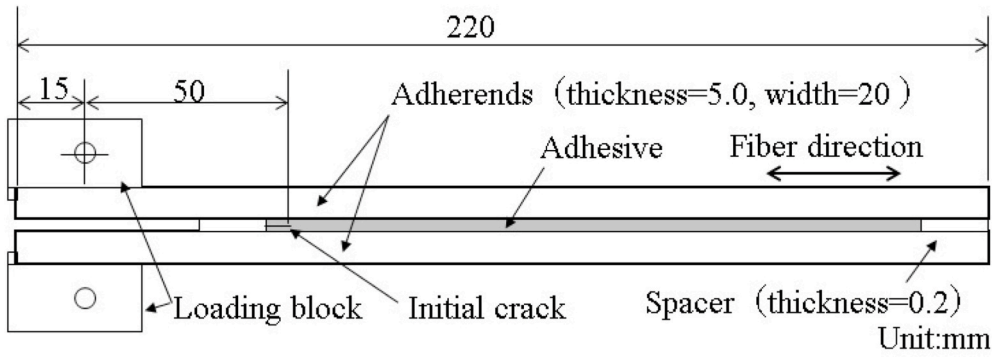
Shape and sizes of adhesively bonded DCB specimen.
